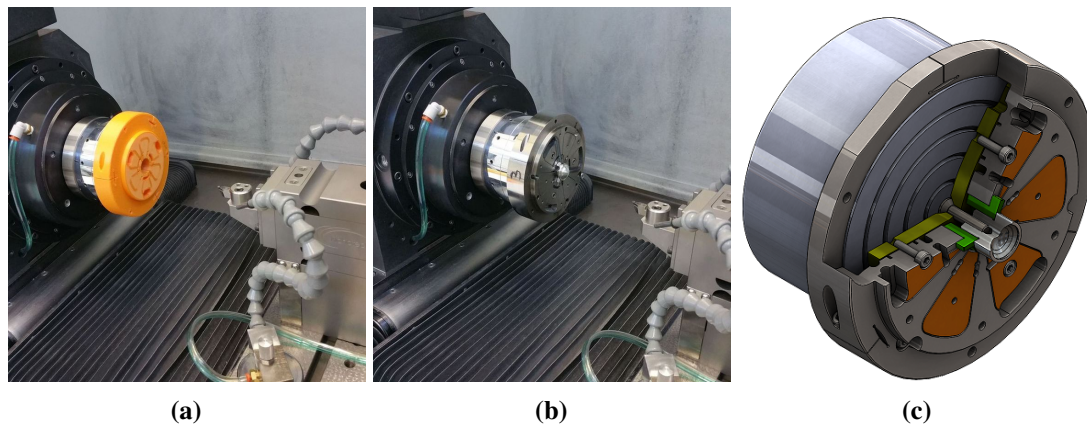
Photograph of chuck installation: (a) 3D printed part installation; (b) final manufactured smart chuck assembly; (c) redesigned 3D model
